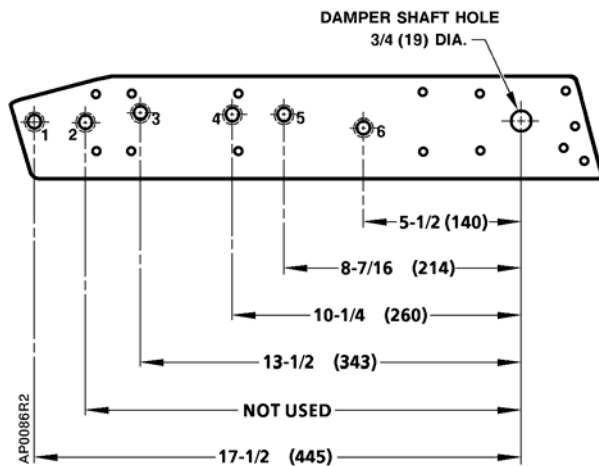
Actuator Mounting Plate 331-623. Dimensions in Inches (Millimeters).
